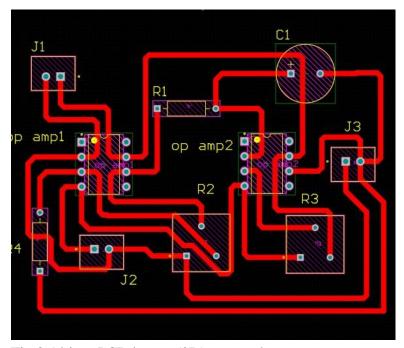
Altium PCB layout (2D) sawtooth wave generator
